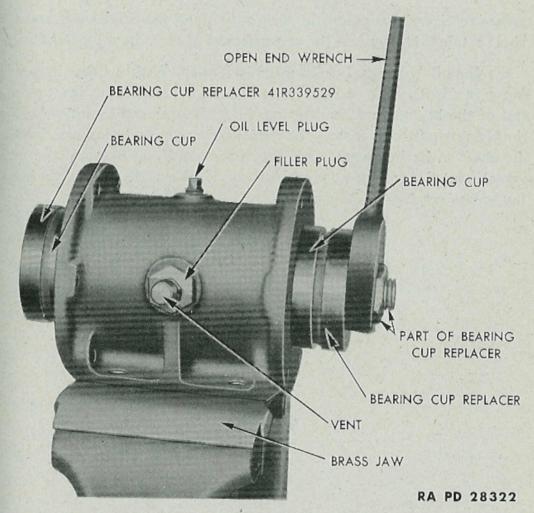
Installing Bearing Cups in Pillow Block Housing with Replacer 41-R-2395-29
